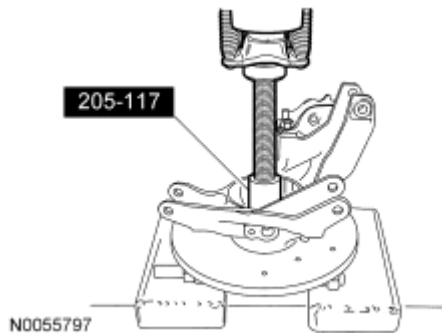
Pressing Wheel Hub From Wheel Bearing Using Special Tool (205-117)
